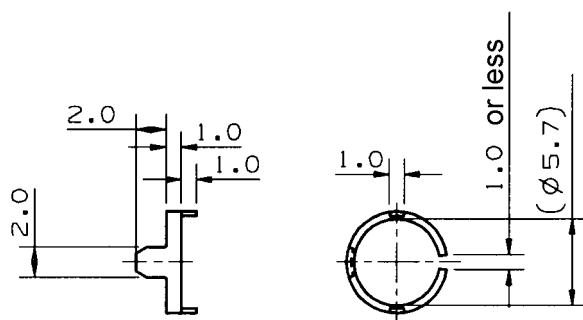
#1-1. Mainbody (Machining frame ytpе)
